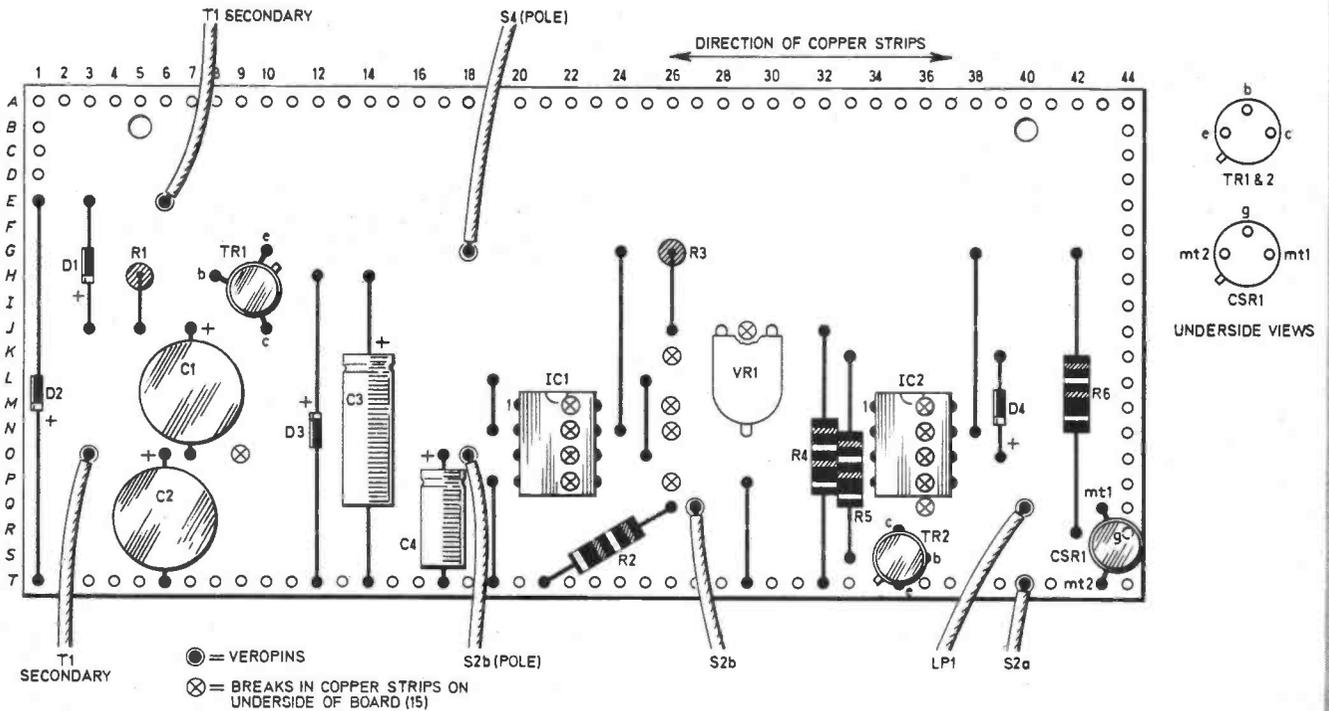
Wiring details for the front panel components, including the wiring to the transformer. Fig. 4. (Below); stripboard layout showing the various breaks to be made. Be extra careful when connecting CSR1 in circuit, as this carries mains voltages, and could be dangerous if connected incorrectly.
